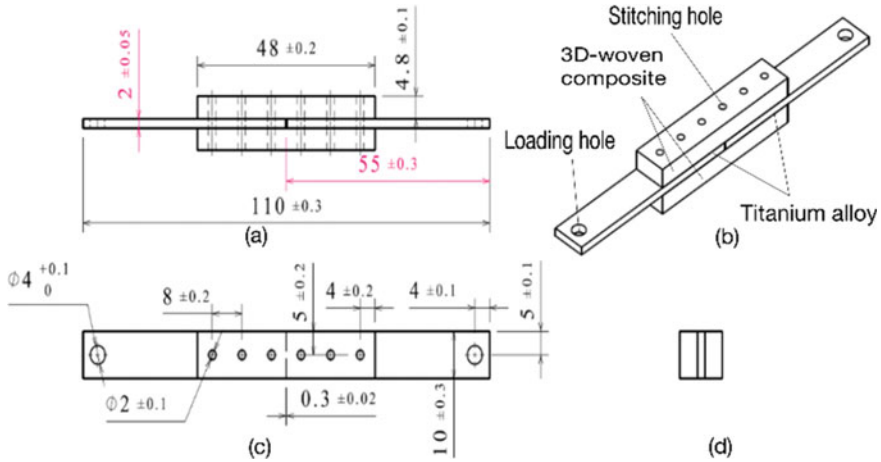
Experimental piece of interlaminar shear strength test a front view, b equiaxial test view, c top view, and d side view
